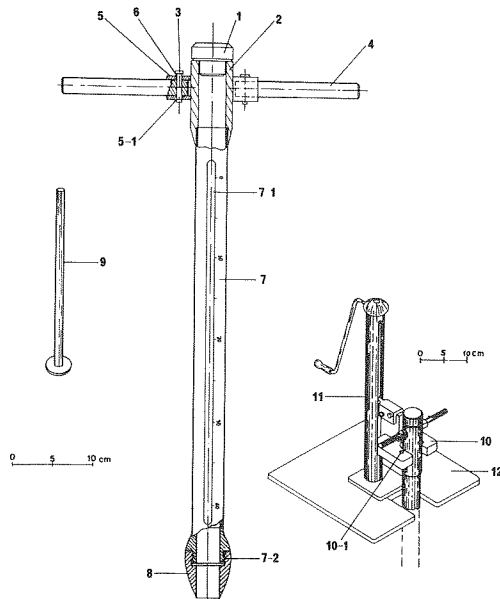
Vertical core sampler: 1, cap; 2, head; 3, pin; 4, handle; 5, shoulder; 5-1, protuberance; 6, pin hole; 7, tube; 7-1, furrow; 7-2, thread; 8, cutting point; 9, compactor; 10, jaws; 10-1, notch; 11, jack; 12 base.
